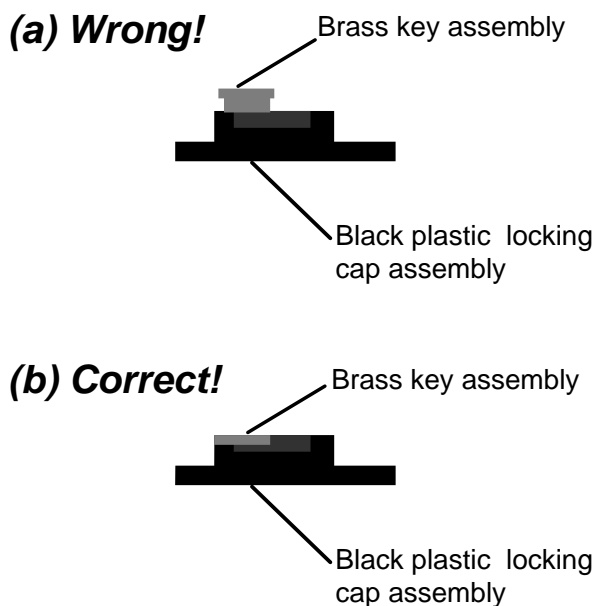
The brass key assembly in relation to the black plastic locking cap, side view: (a) do not install in this orientation and (b) install the locking cap only when the top of the brass key assembly is flush with the black plastic housing of the locking cap assembly.
